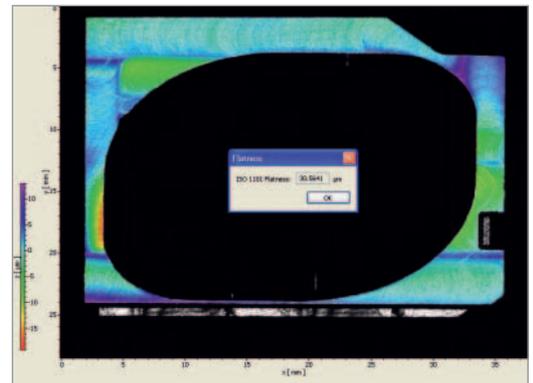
A defective mirror holder shows a flatness measurement ($> 30 \mu\text{m}$) that fails dimensional tolerances (ISO 1101).
